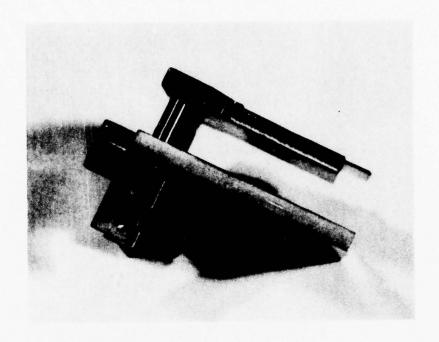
ELEVATOR TRIMMING FIXTURE
